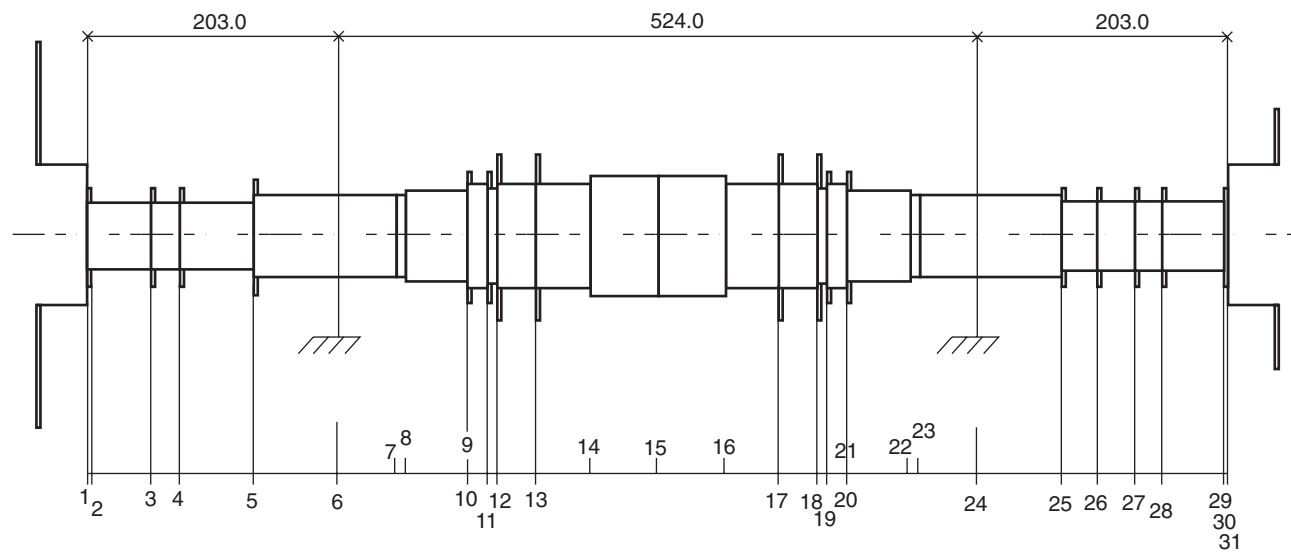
Pinion Rotor Model—Integrally Geared Compressor
